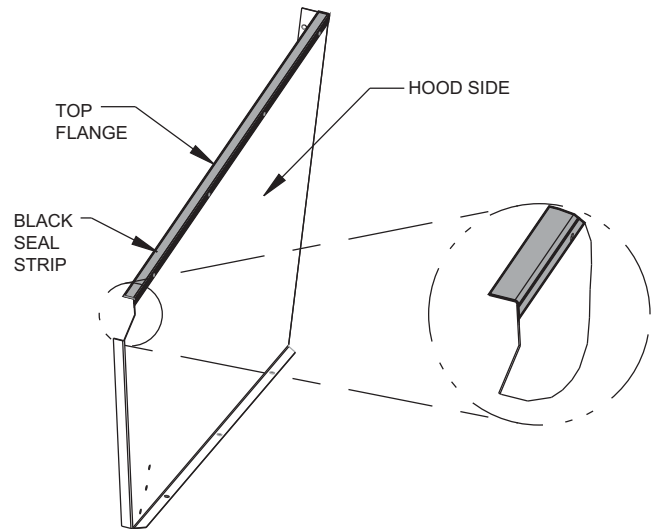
Adding Seal Strip to Top of Hood Sides
